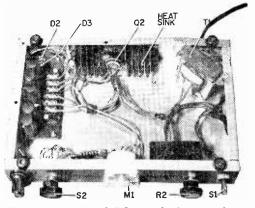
Power-transistor mounting is much easier on pre-drilled heat sink—otherwise use insulating washer as a drill template.
